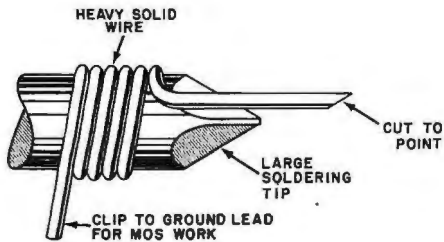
To prevent damage to MOS devices during soldering, prepare this special tip for soldering iron.
